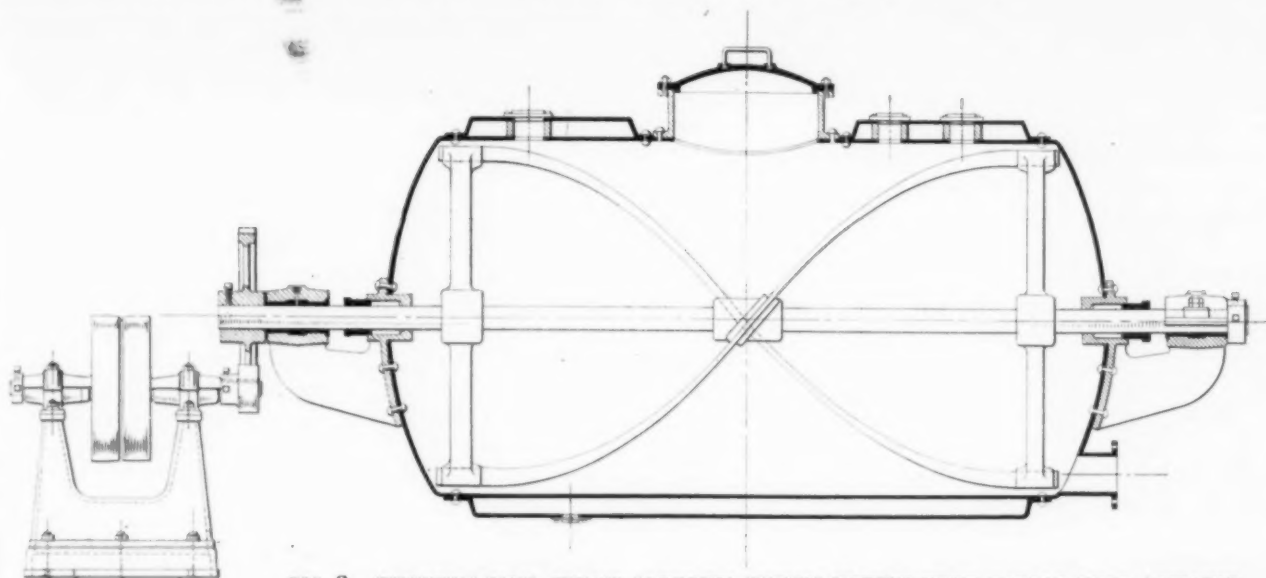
WROUGHT IRON, STEAM-JACKETED FUSION KETTLE WITH PADDLE TYPE AGITATOR PROVIDED WITH SPIRAL FLOATS
